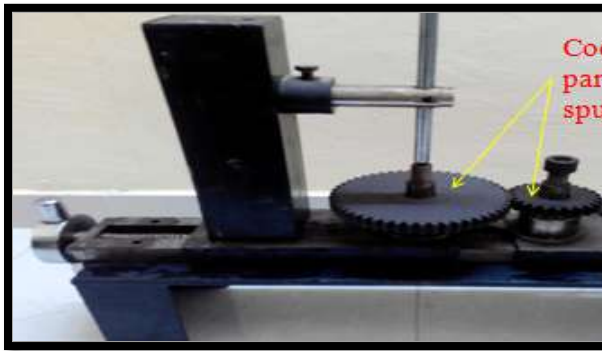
CSPE composite gears mounted in Parkinson gear tester
